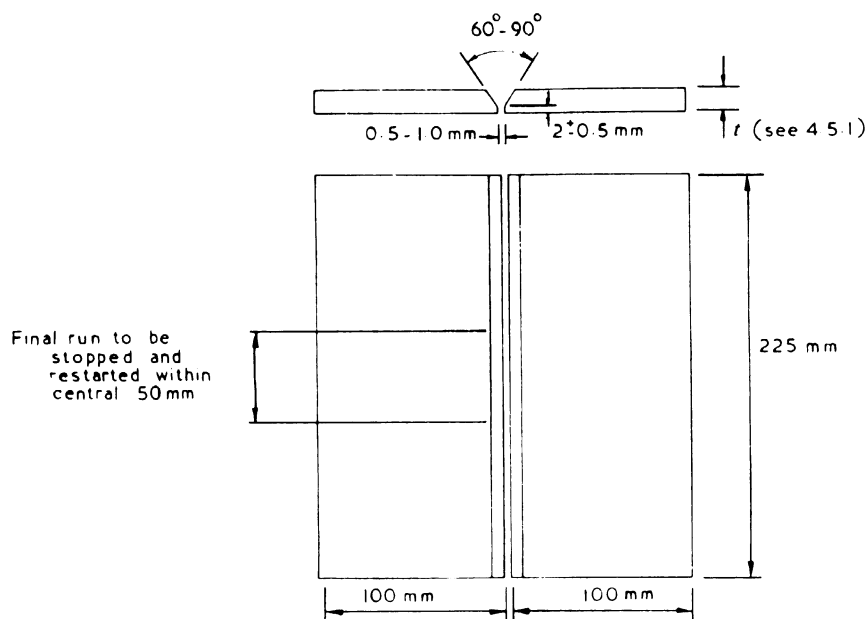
Test piece for butt weld in plate (without backing, welded from one side)
